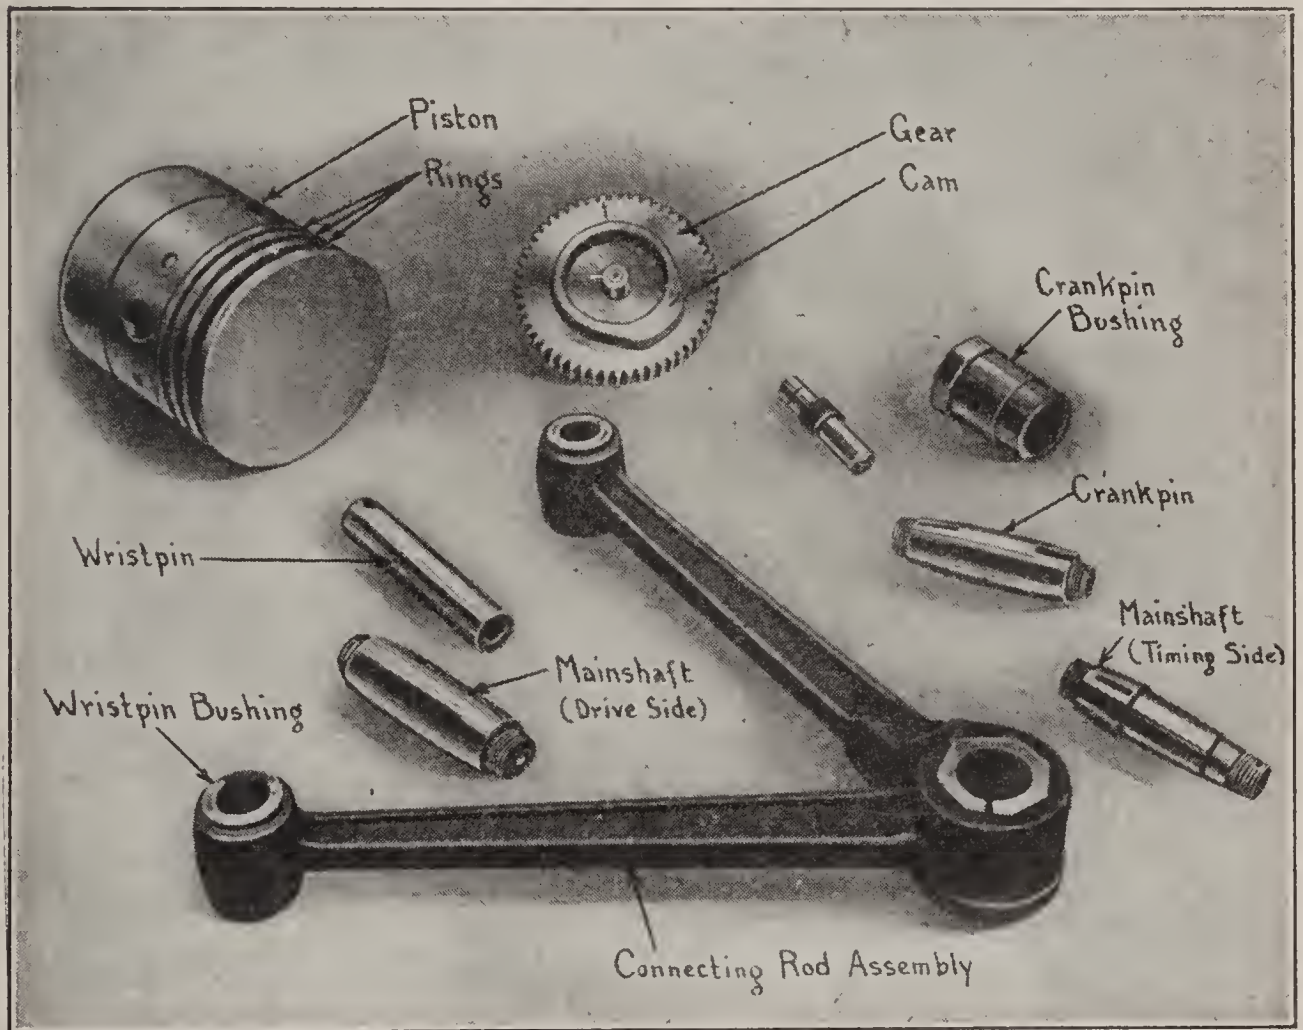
Group Showing Some of the Internal Parts of the Reading-Standard Twin Cylinder Motor. Note Arrangement of Connecting Rod Assembly.
